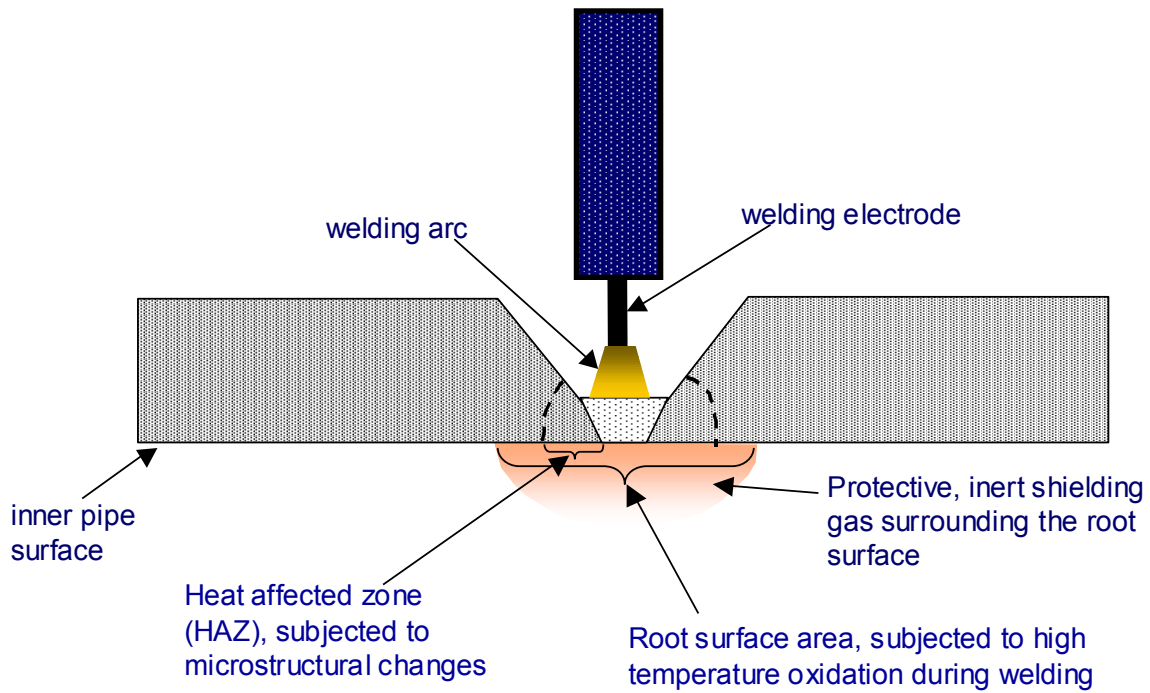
Illustration of the impact of welding on the pipe close to the weld metal.
